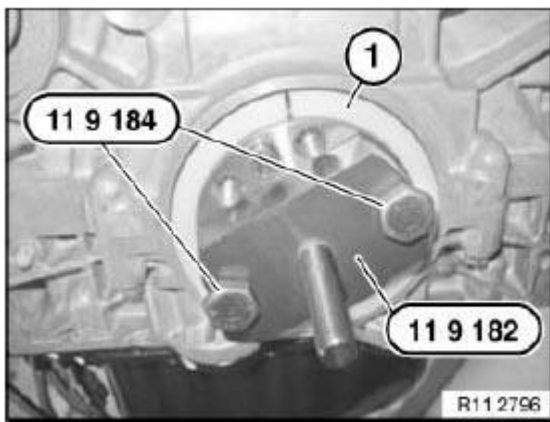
Identifying Spacer Ring With Special Tool (11 9 182 And 11 9 183)
